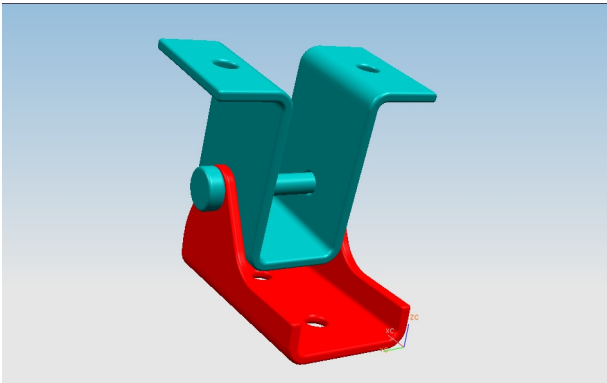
AUTOMOTIVE DOOR HINGE ASSEMBLY
